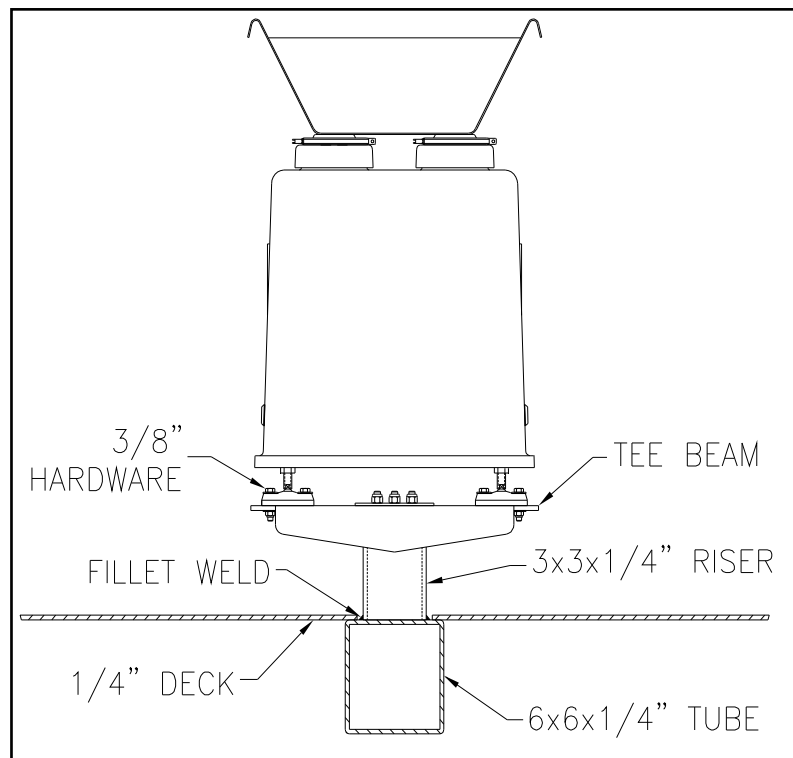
T-Pedestal Welded to Central Spine
